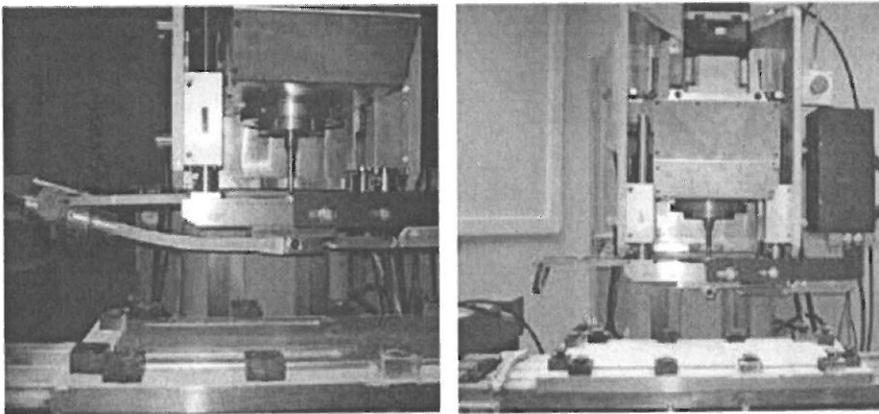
FIGURE – Photographs of the Ultrasonic Stir Welding equipment
